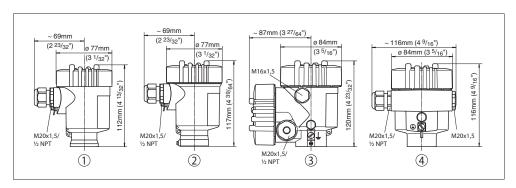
Housing versions (with integrated PLICSCOM the housing is 9 mm/0.35 in higher)
